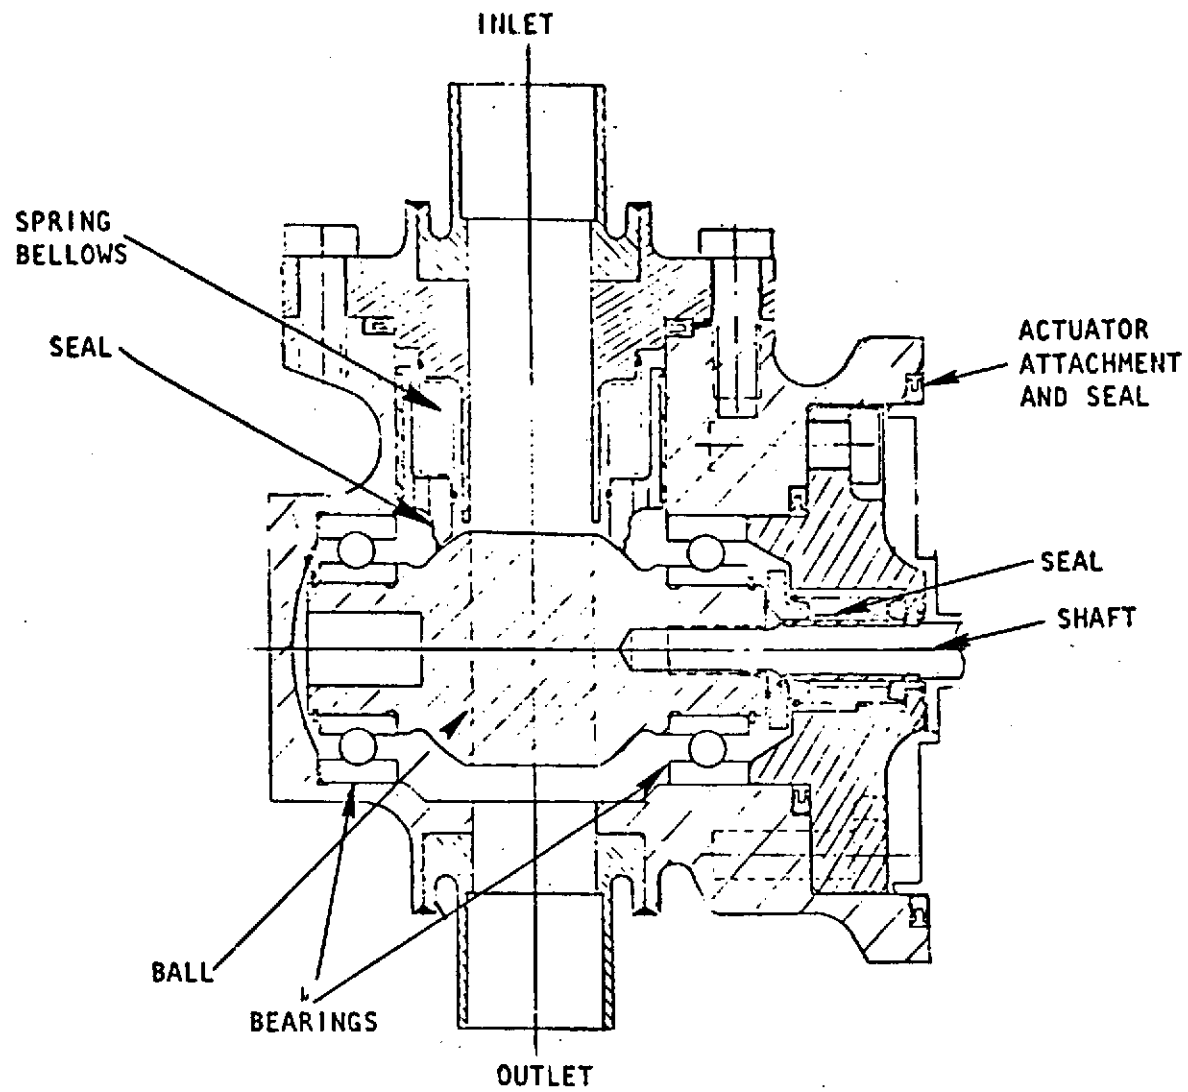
Control Valve for Preburner Fuel Inlet and Thrust Chamber Oxidizer Inlet
